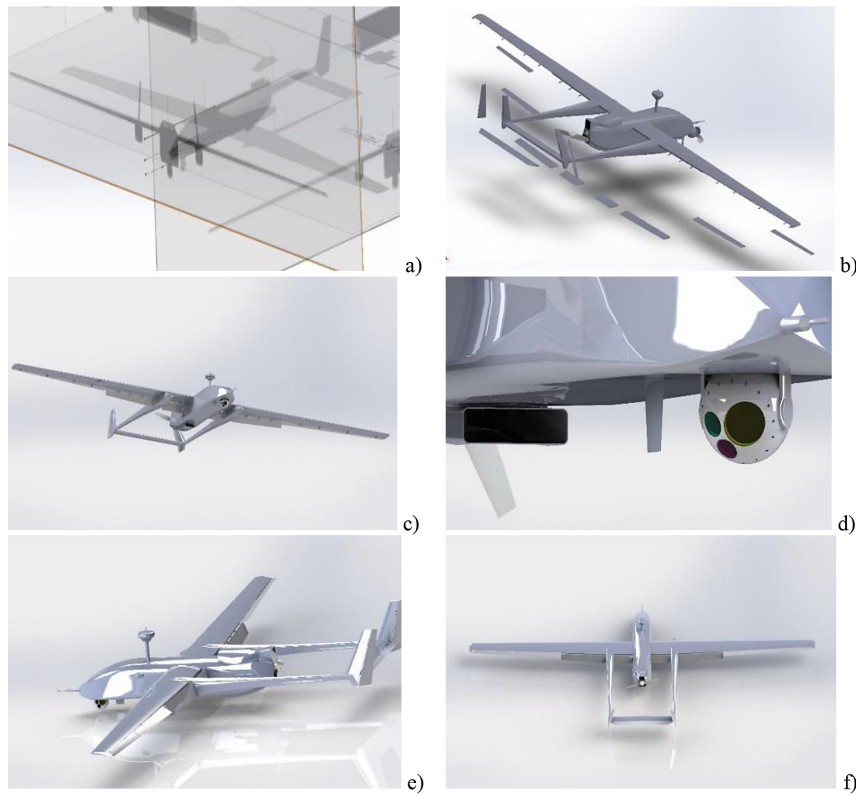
IAI Heron- a) sketch picture, b) exploded view, c) with flap displacement – bottom view, d) fuselage bottom part with visible moveable optoelectronic head and air inlet, e) with flap displacement – left-hand side view, f) rear view
